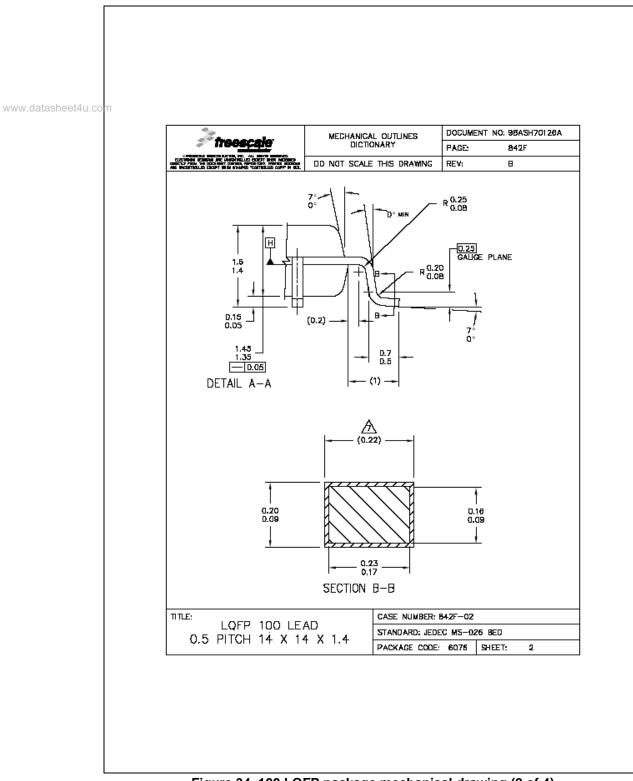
100 LQFP package mechanical drawing (2 of 4)
